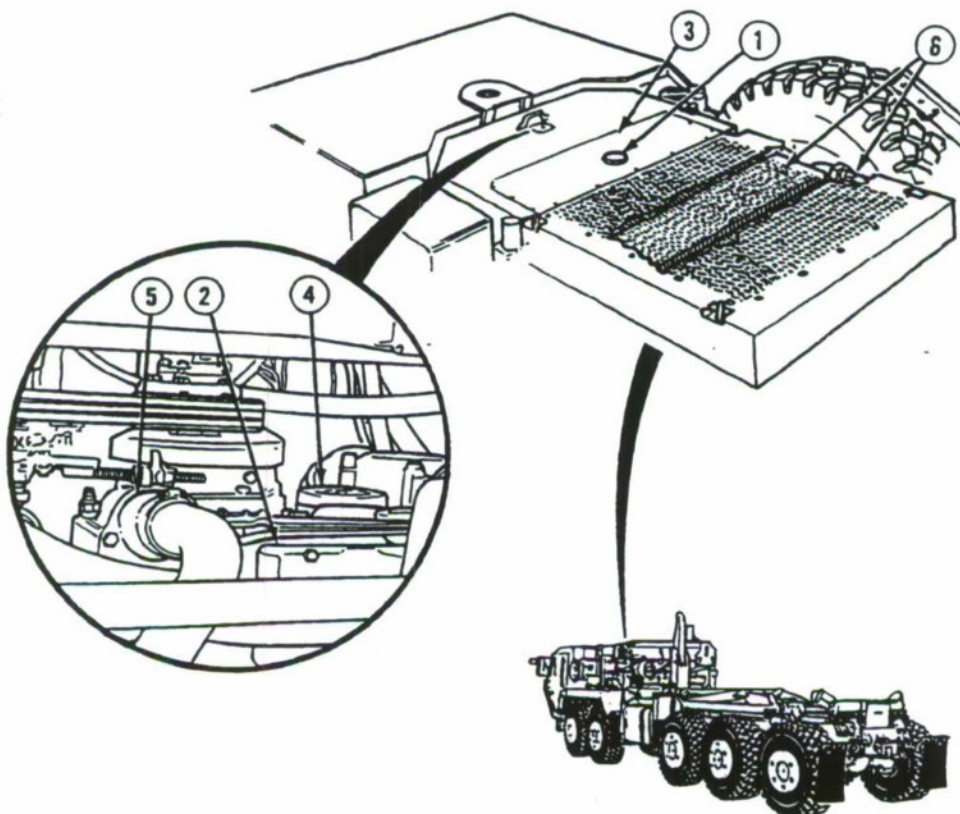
PLS Cooling System - (1) Radiator filler cap, (2) Engine, (3) Radiator tank, (4) Water pump, (5) Thermostats, and (6) Air to oil cooler.
